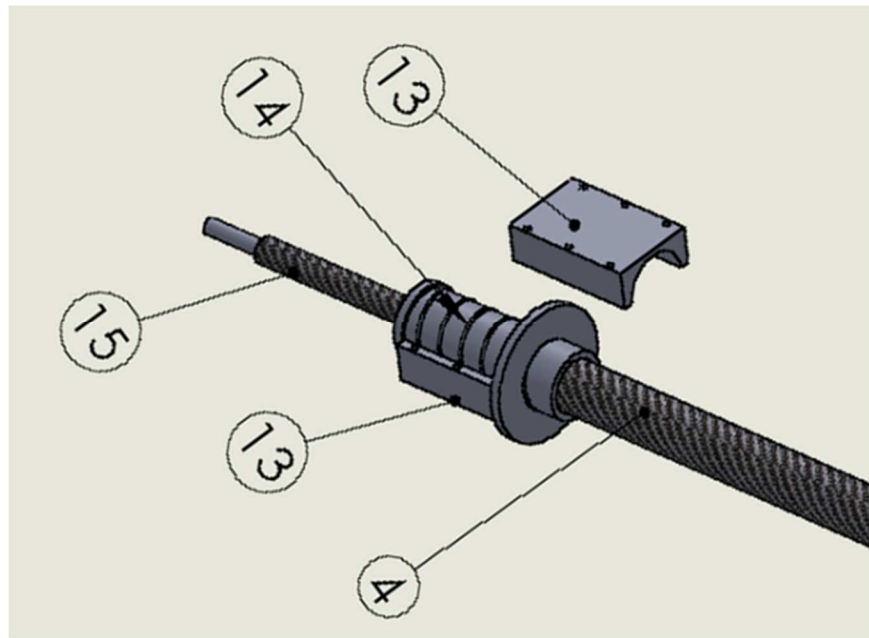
5: An exploded view of the aluminum swivel tube assembly
